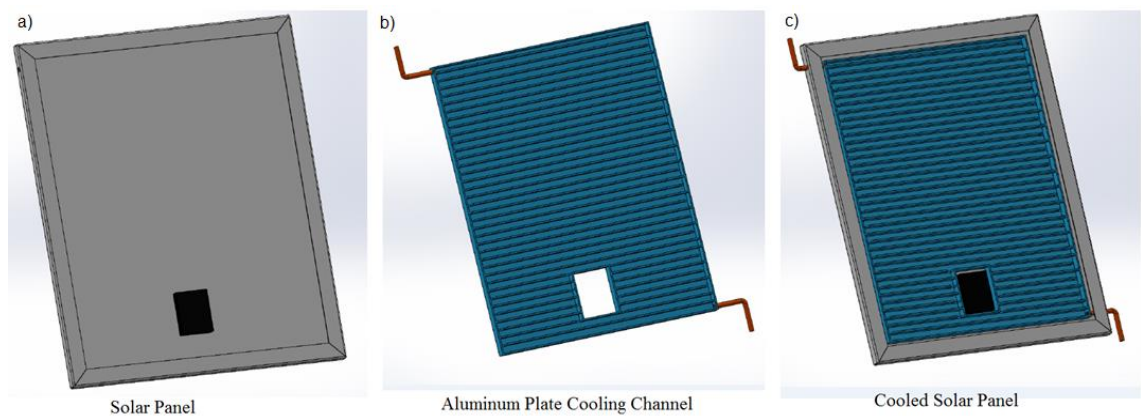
a) Solar panel, b) Designed cooler plate, c) The combined system
